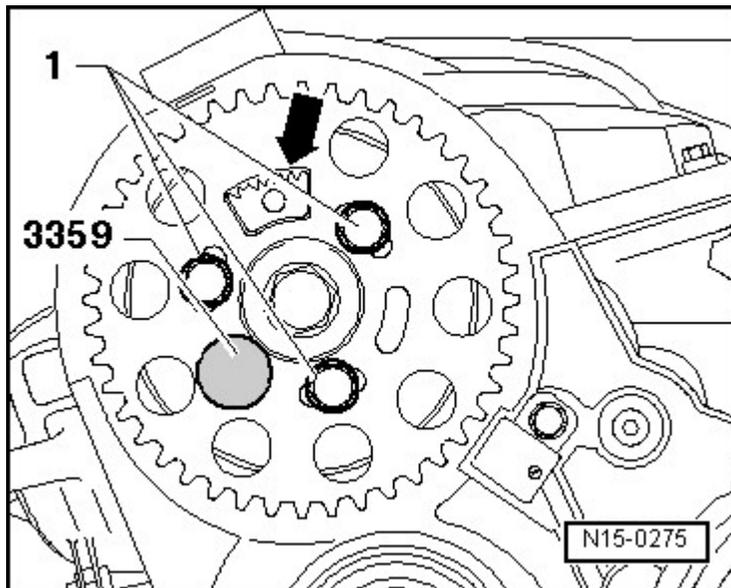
Identifying Camshaft Pulley Bolts And Toothed Segment -Arrow- Must Point Upward
